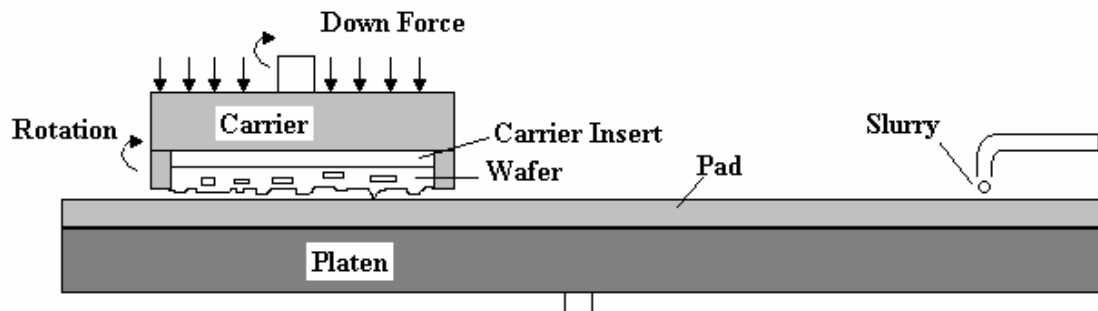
Schematic of a basic rotary CMP machine, showing wafer, carrier, pad and platen [2].
